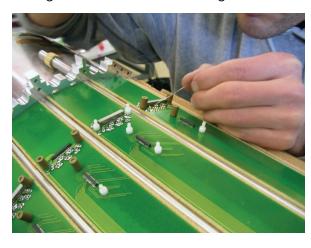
Soldering of the copper plated aluminum power wires to the Supply Tube printed circuit boards.
